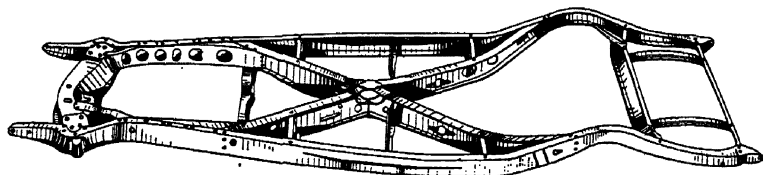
The Oldsmobile Frame for Independent Front Wheel Springing.
